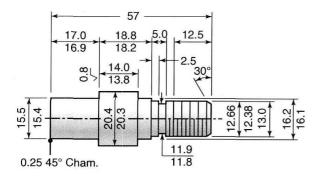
A machined and threaded part, showing various dimensions and tolerances; all dimensions are in mm. Note that some tolerances are only a few tenths of a mm.
